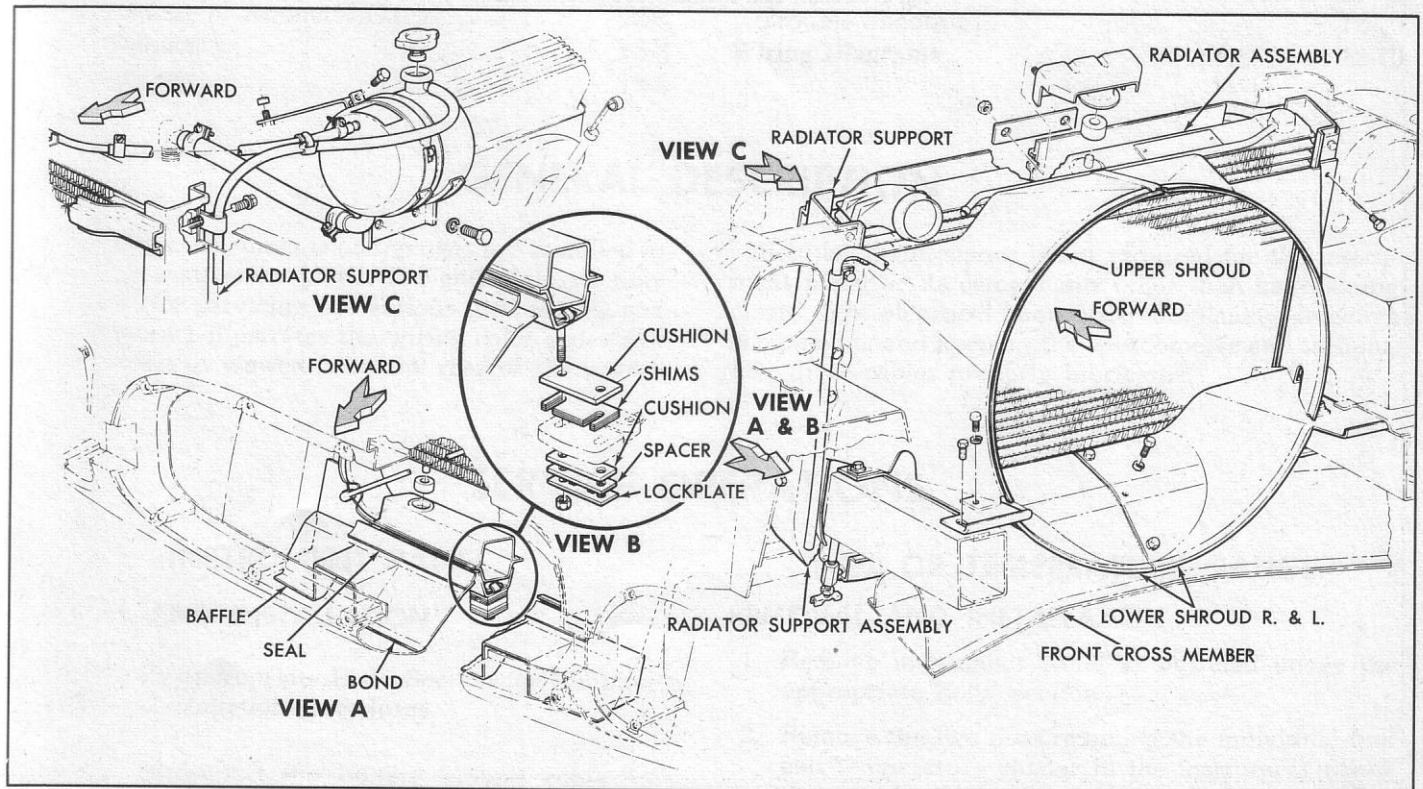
Radiator, Support, Tank, Lower Baffle and Shrouds
